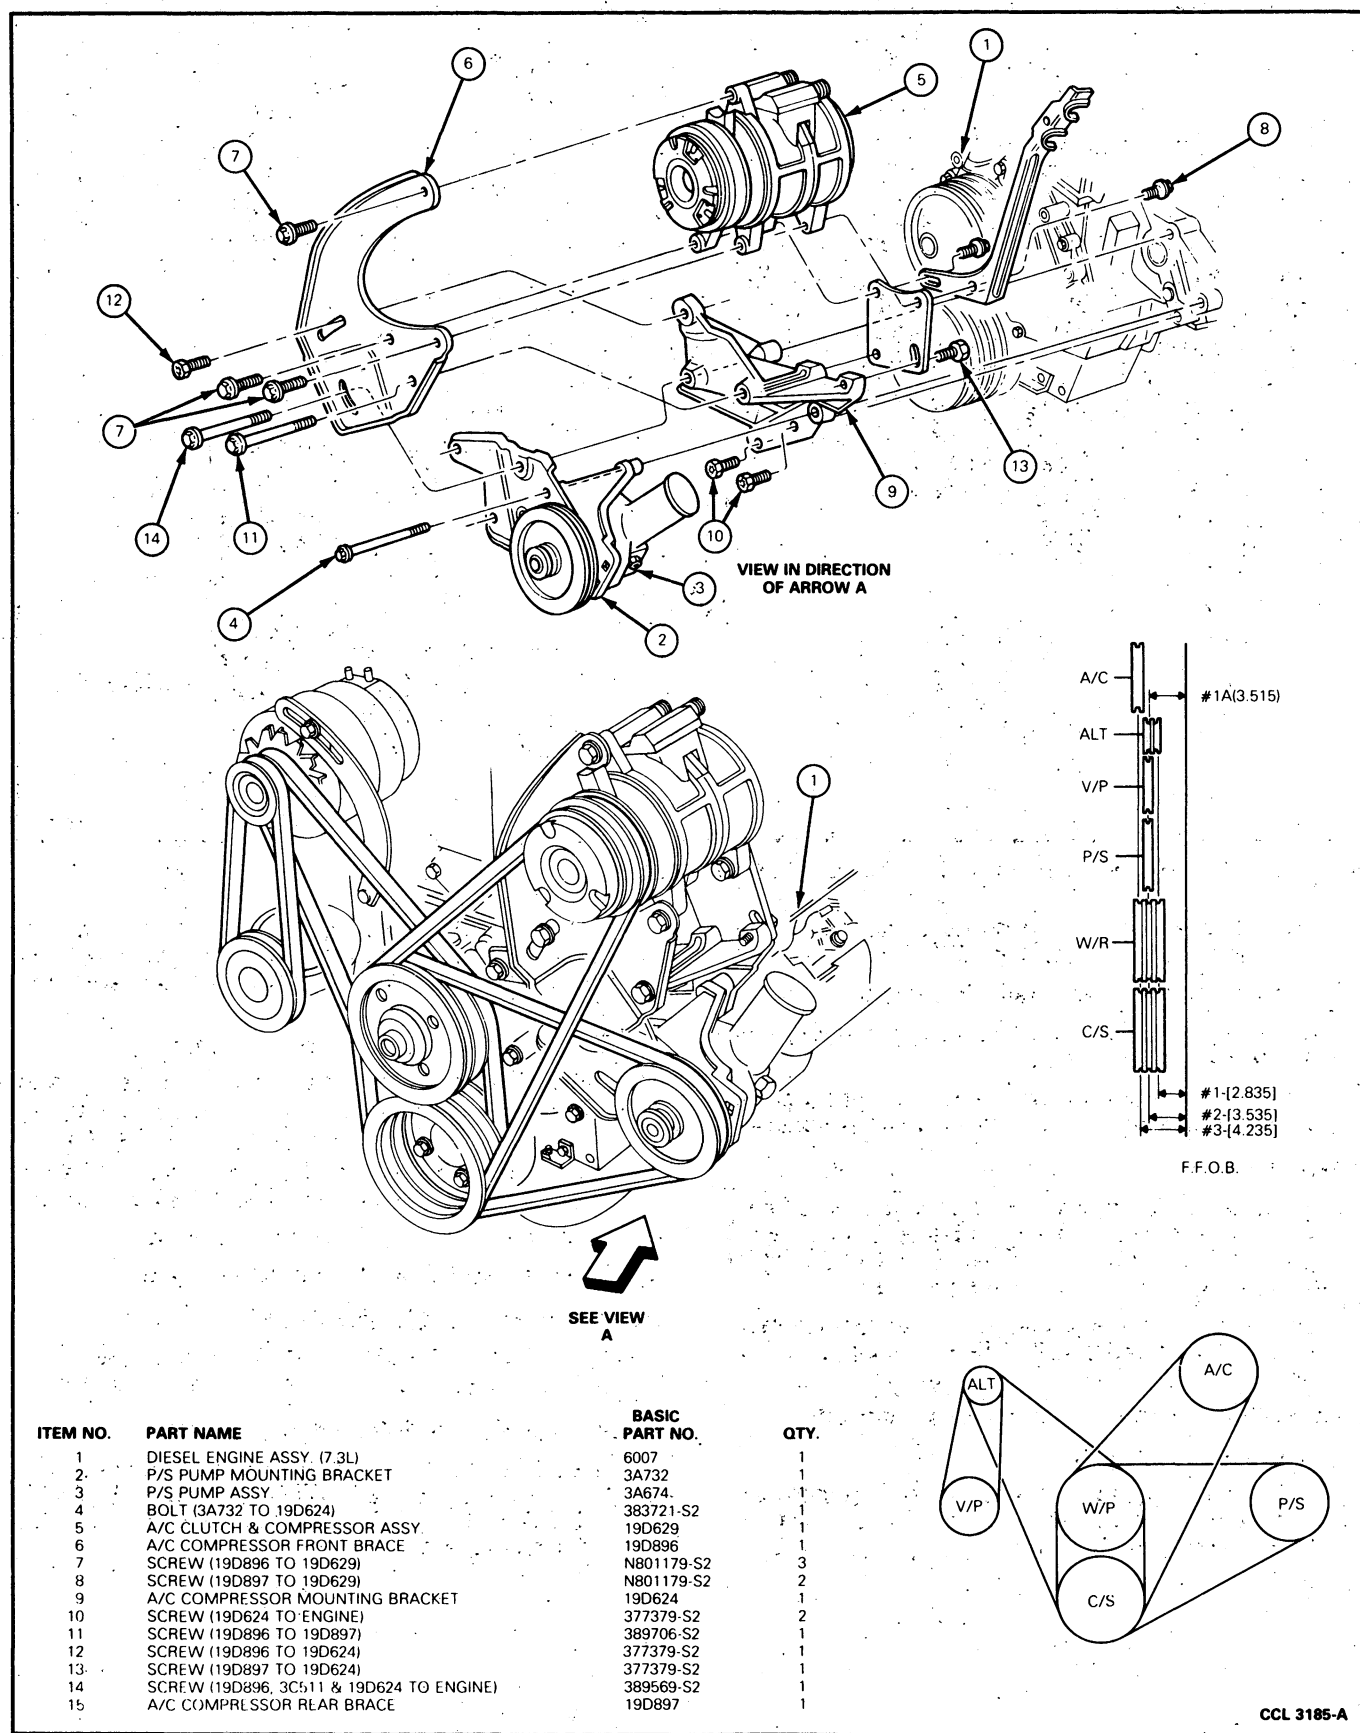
6E171 Compressor Installation—7.3L Diesel Engine
